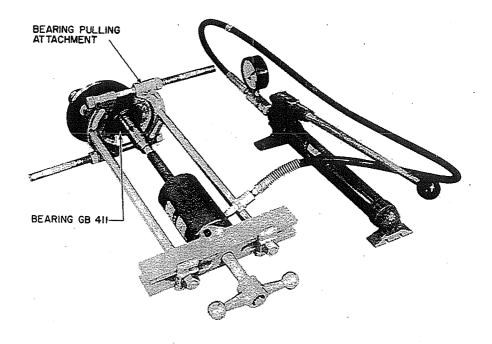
2 to 1 Shaft, Removal of Bearing GB411
